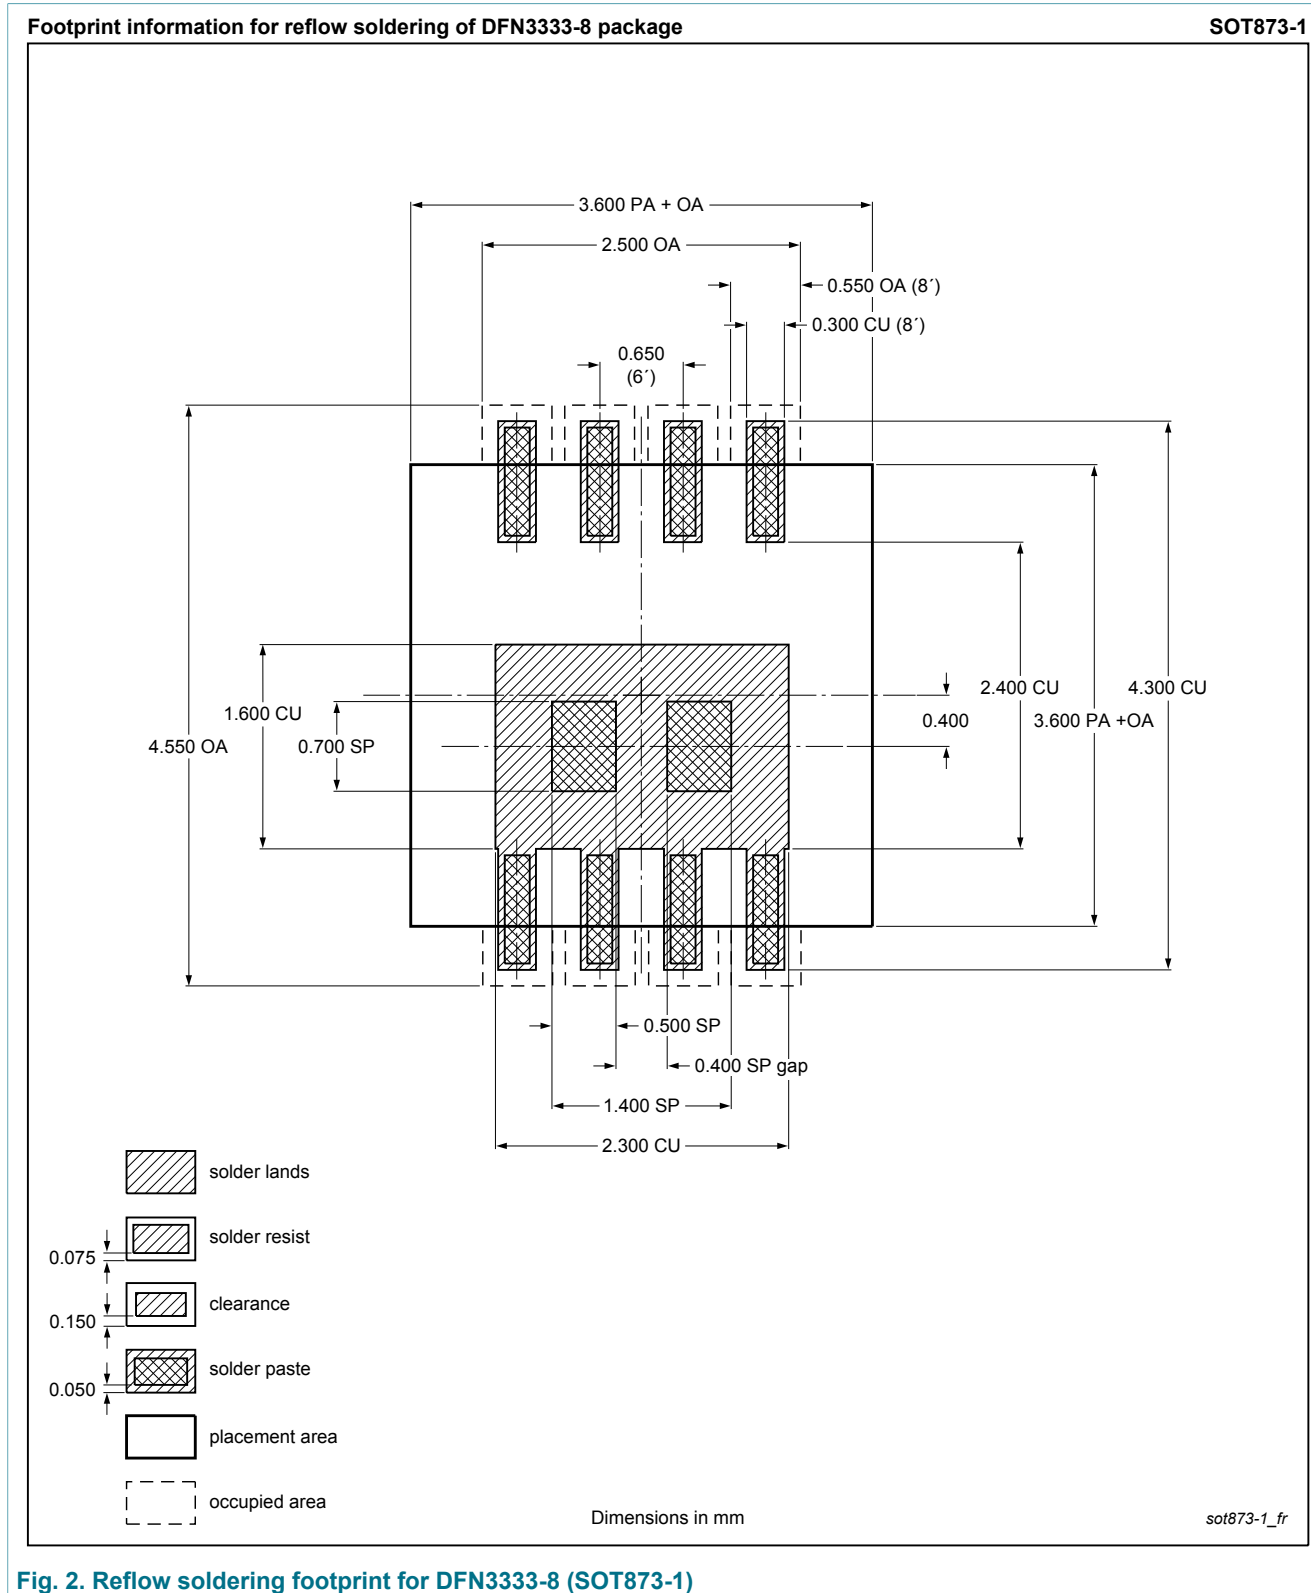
Reflow soldering footprint for DFN3333-8 (SOT873-1)
